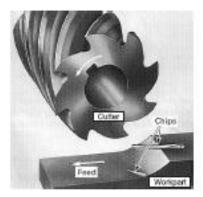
Milling operation. The cutter is lifted to show the chips, and the work, transient, and machined surfaces.
